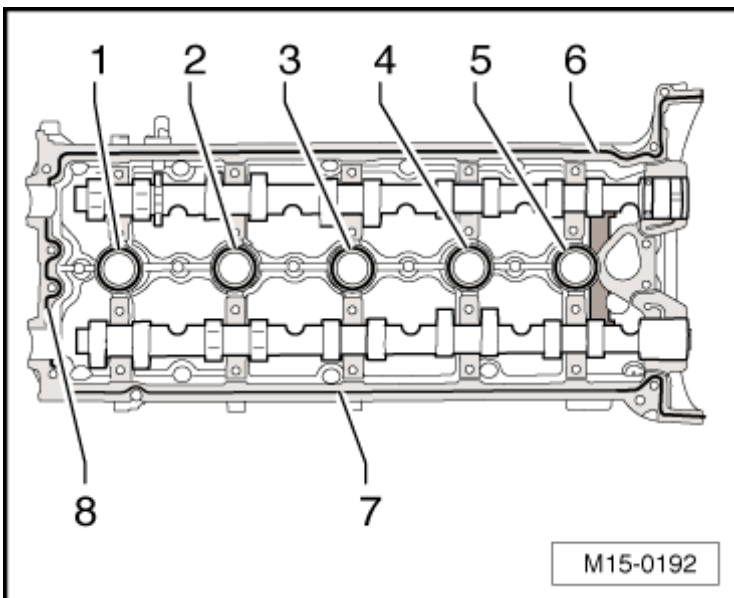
Identifying Bead Of Sealant Lightly Applied Into Clean Grooves Of Guide Frame
